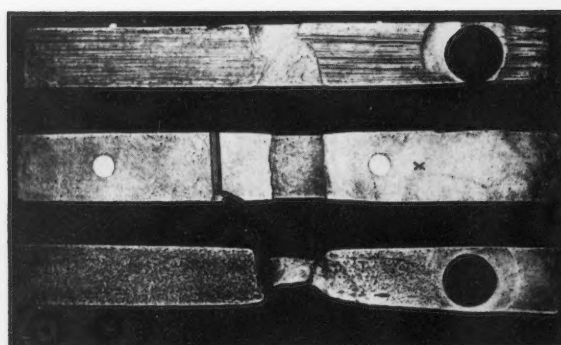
Submerged arc welded specimens exposed in liquid phase of carbon steel sulphate digester for 7000 hours. Top—ASTM—A212 and Oxweld 40, as welded. Center—ASTM—A70 and Oxweld 36, as welded. Bottom—ASTM—A70 and Oxweld 36, stress relieved.
